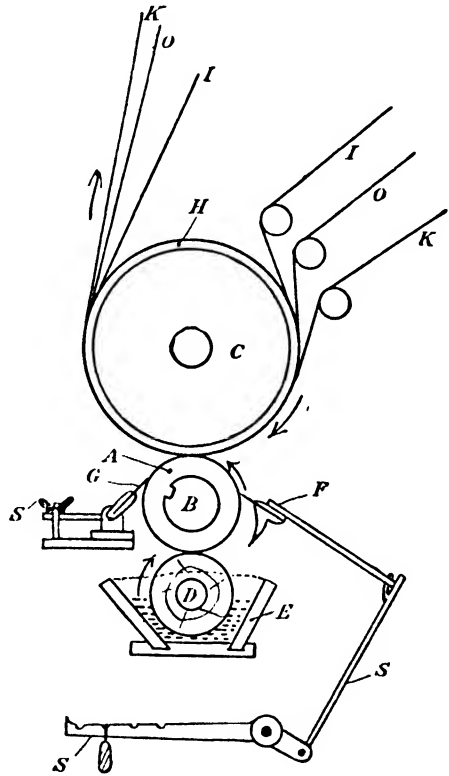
Diagrammatic section of a single-colour roller machine.
